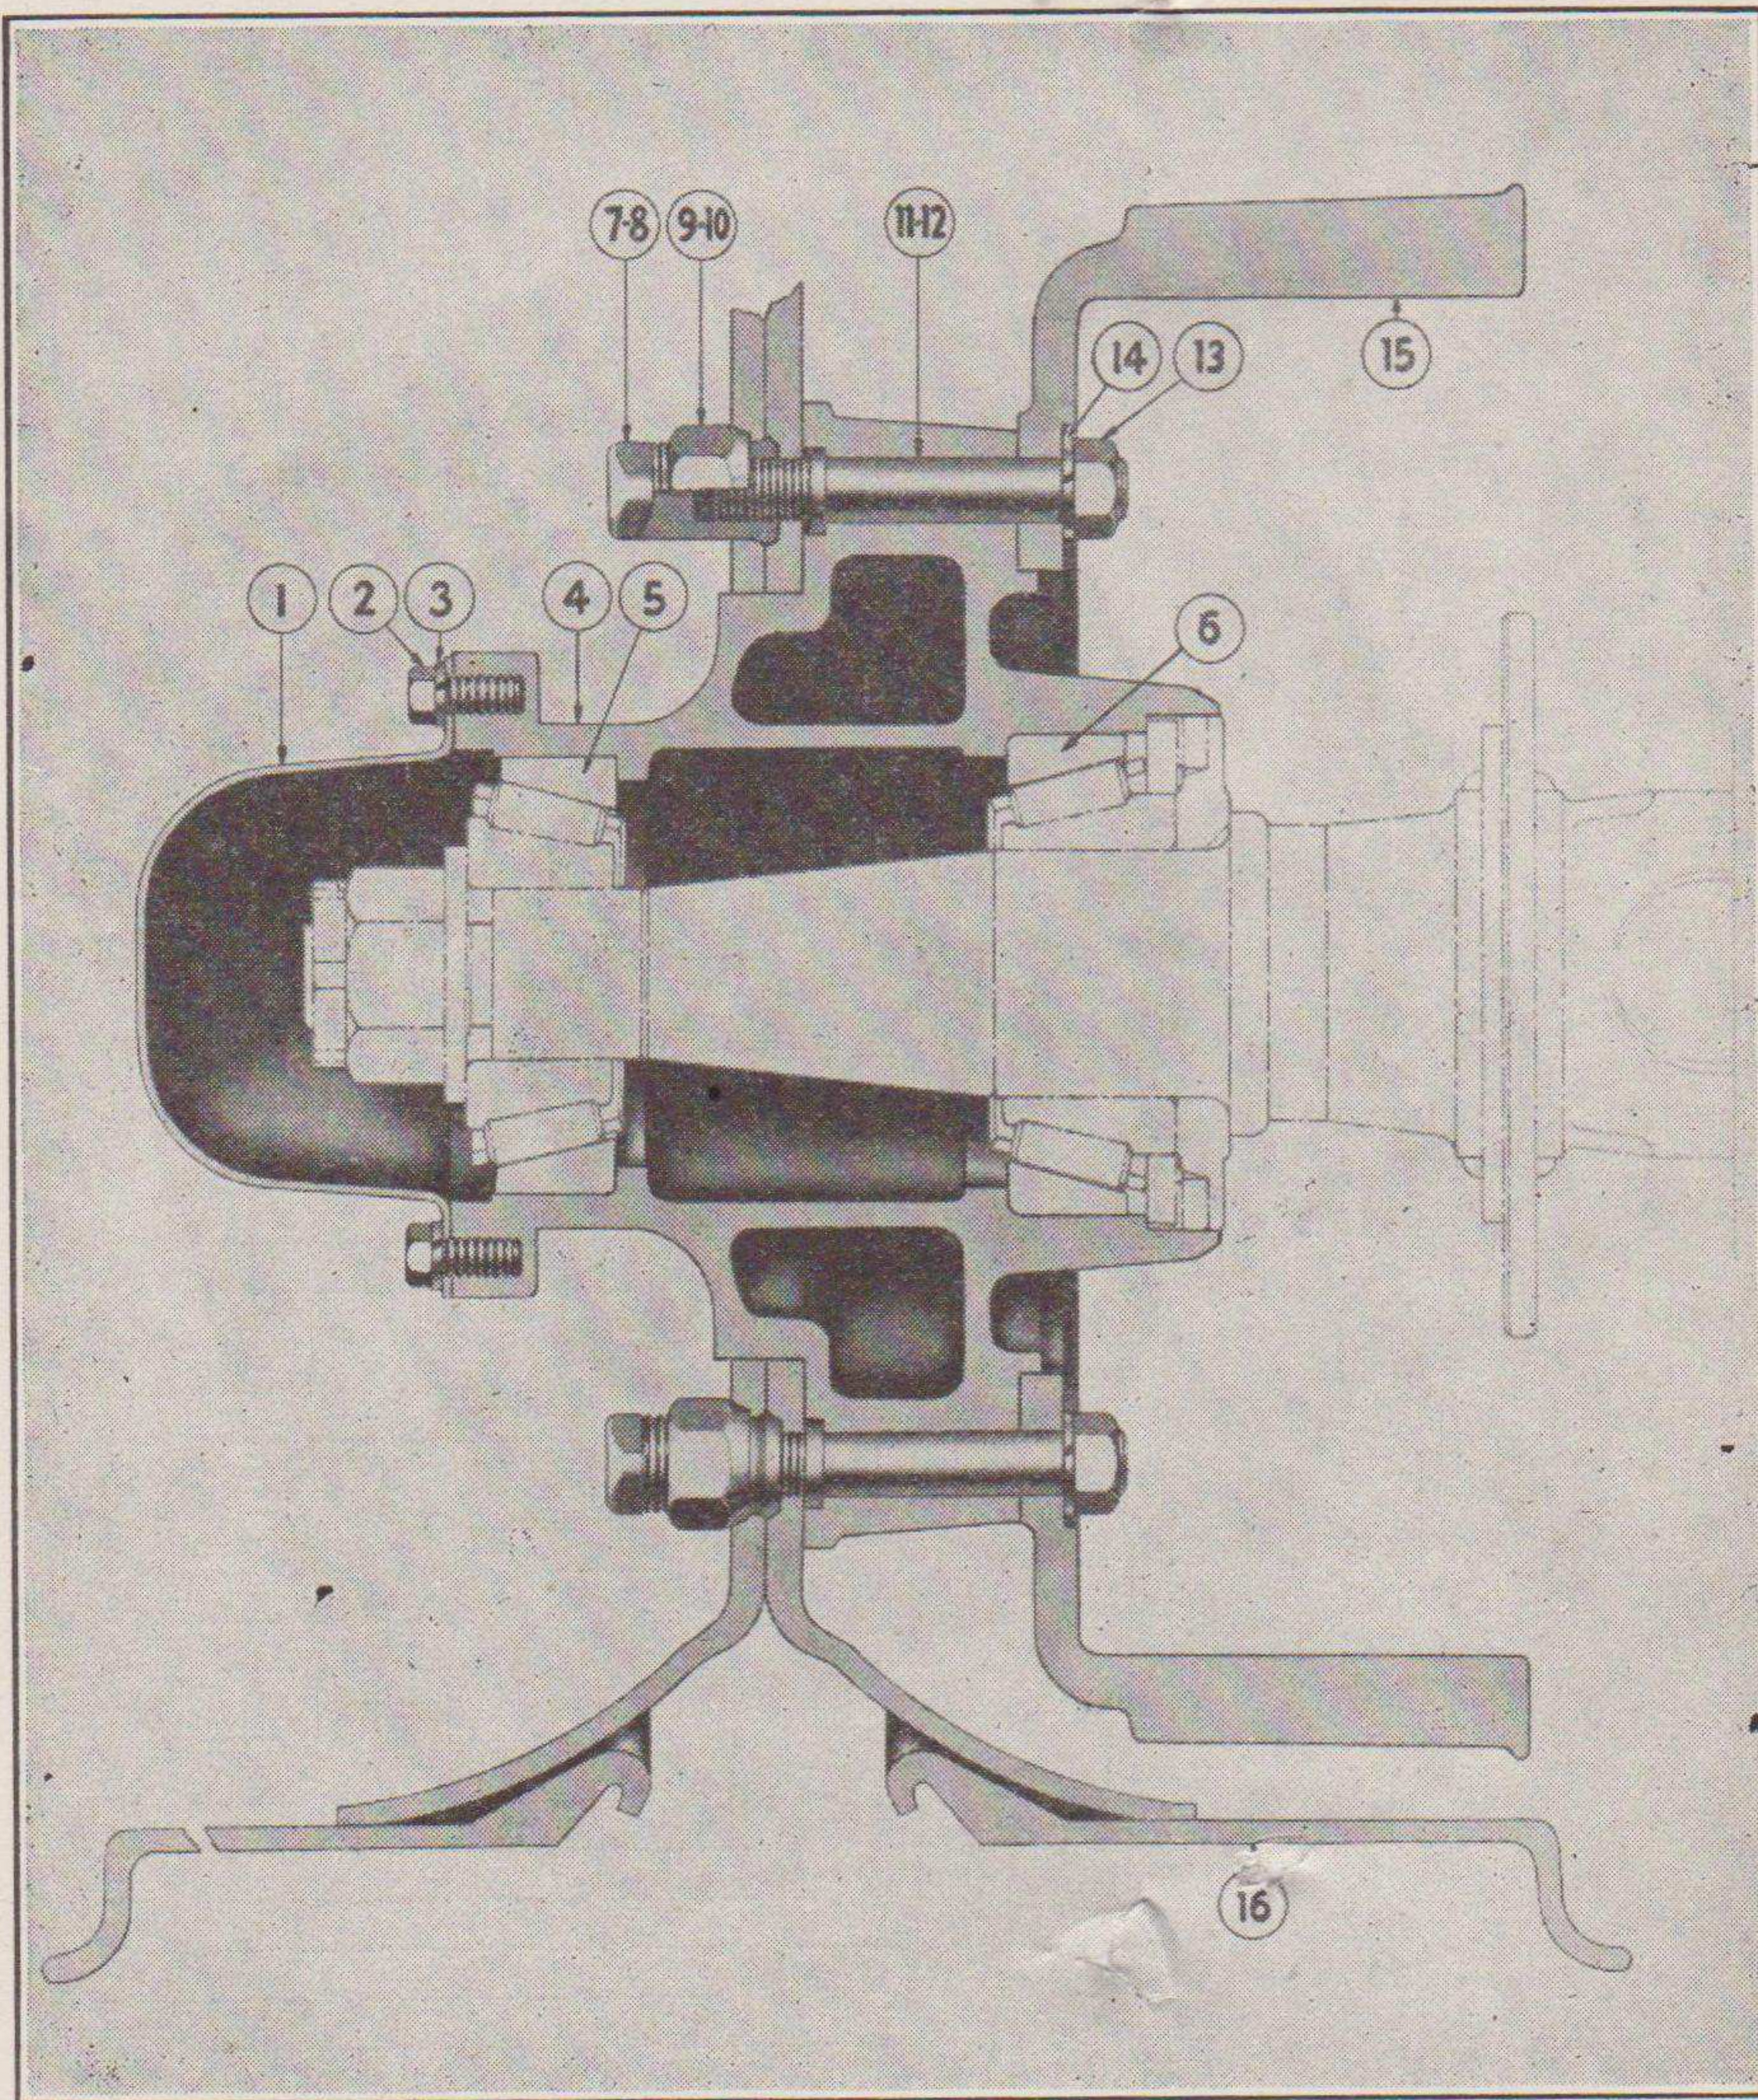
WHEELS, HUBS AND DRUM ASSEMBLY
